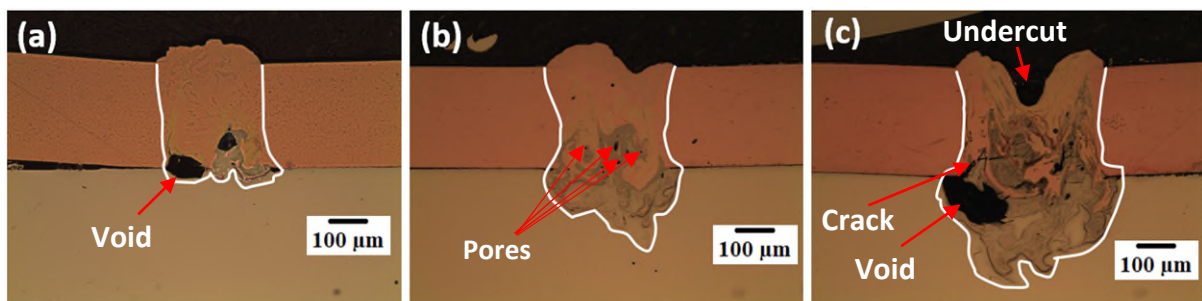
Macro view of the laser welded Cu[Ni] tab to Al busbar at (a) under-weld, P= 525 W (b) good-weld, P= 600 W and (c) over-weld, P= 900 W
